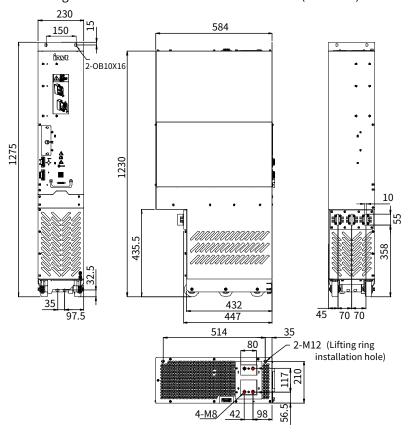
Installation dimensions of A8 unit fast connector (unit: mm)
